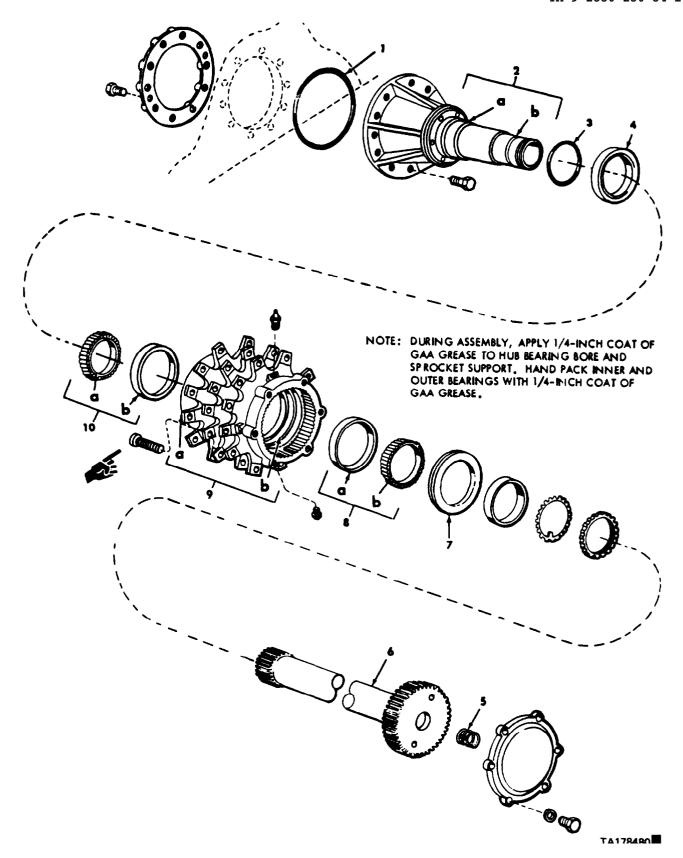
Track drive sprocket hub and axle shaft - repair data.
